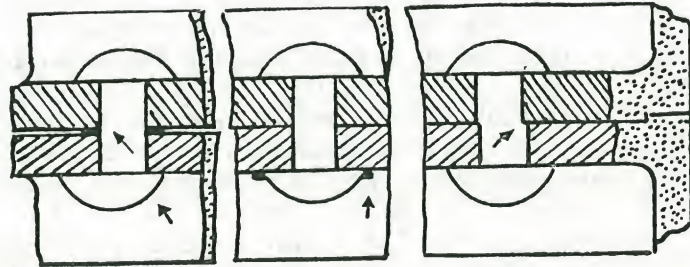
EXAMPLES OF DEFECTIVE RIVETING
